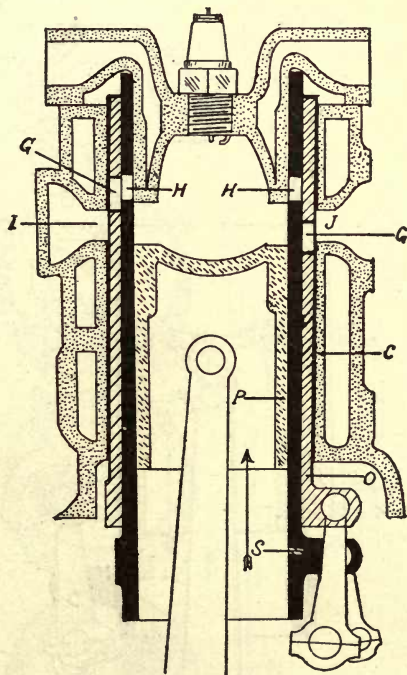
Knight Sleeve-valve Motor; Section to show Operation
